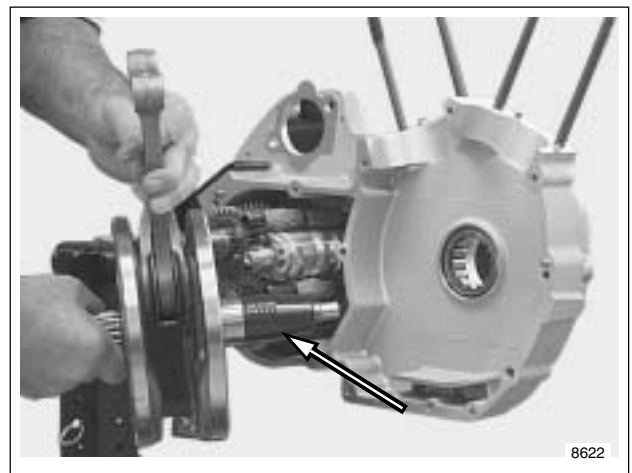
Installing Flywheel Assembly with CRANKSHAFT GUIDE (Part No. HD-42326)
